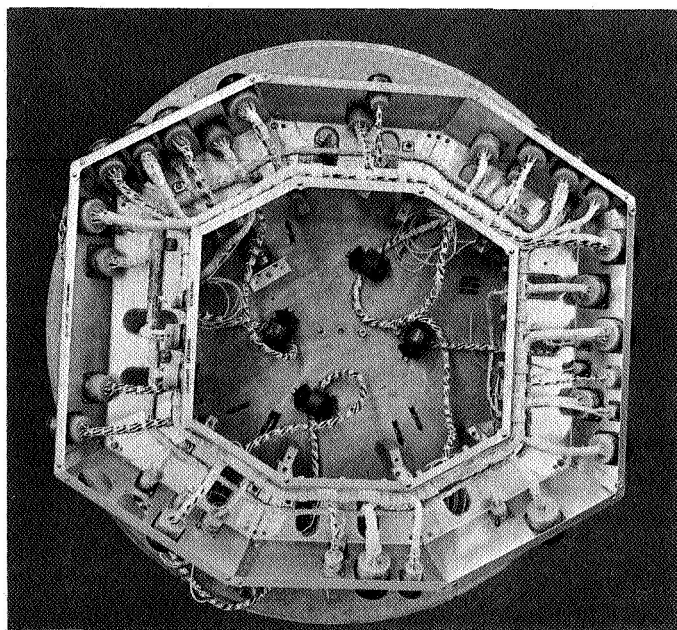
Upper ring harness and tray on fabrication and handling fixture
